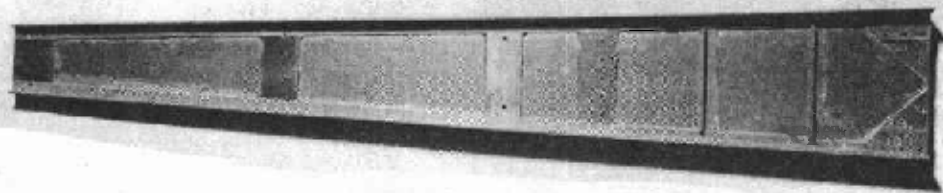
The papreg I-section rear spar used in the final design of the fin.
